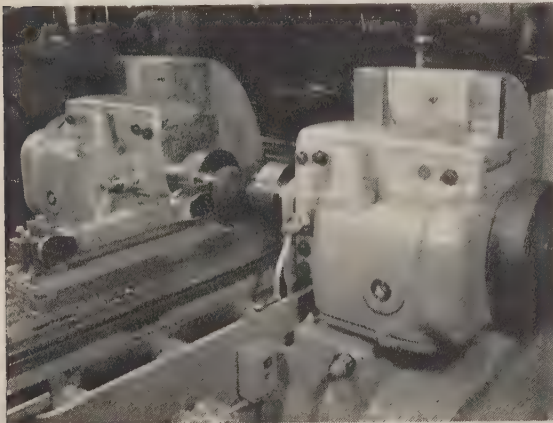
SETUP FOR MILLING OUTSIDE OF YOKE ON DRAG LINK
